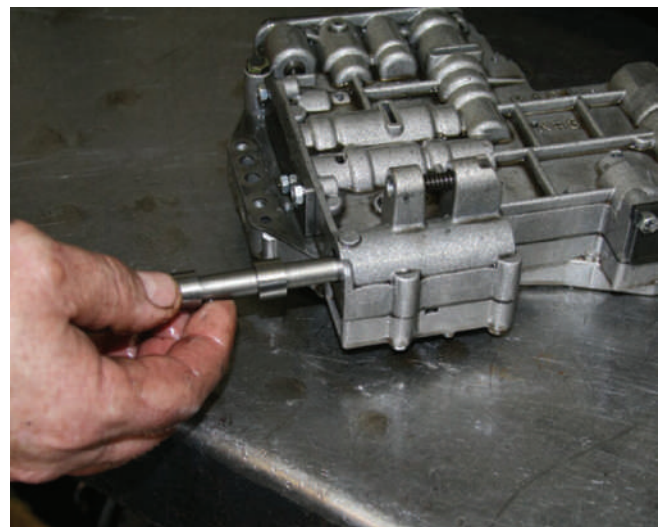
When removing valves from the valve body, check them for damage.
